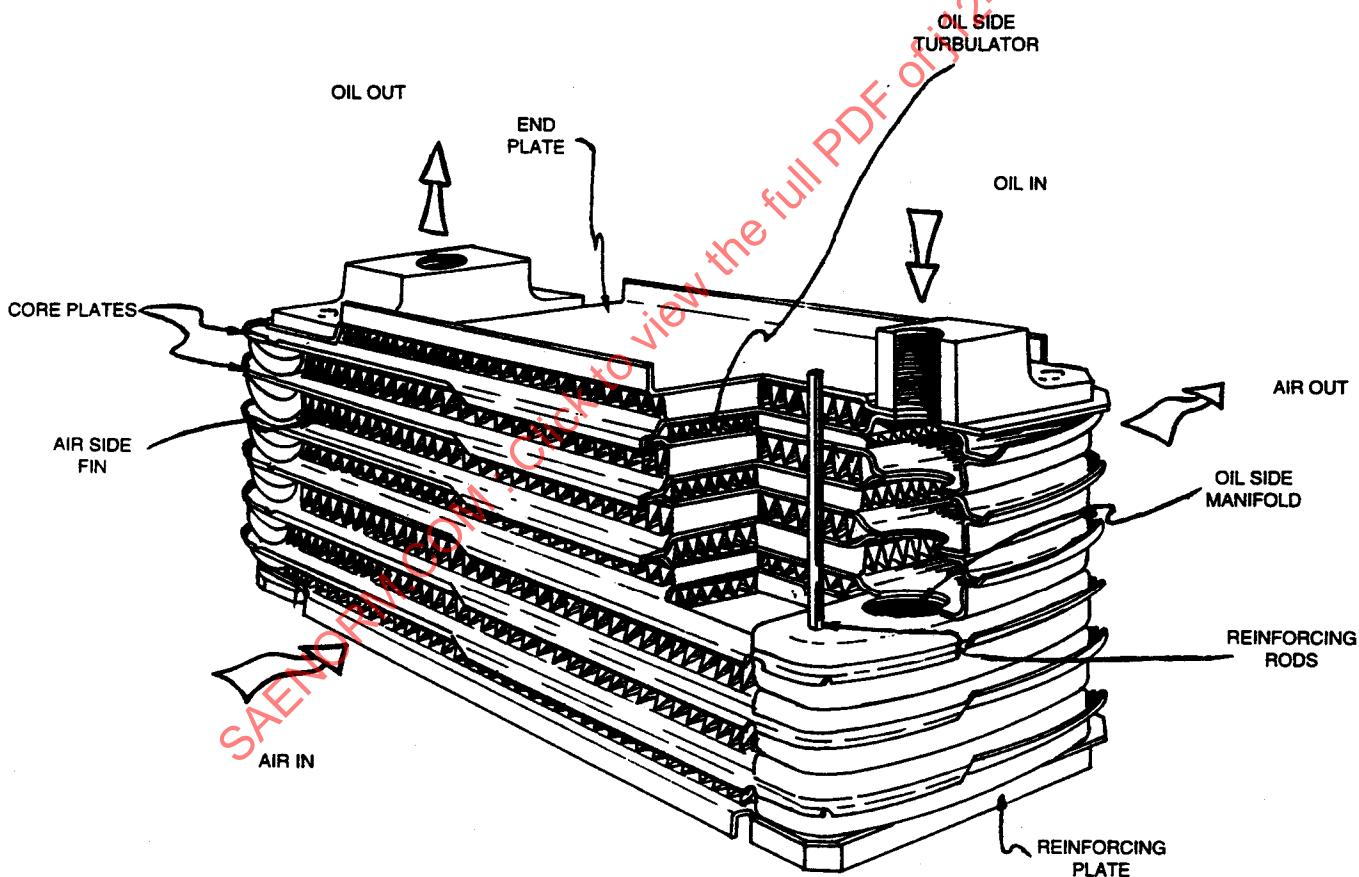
PLATE FIN SEPARATOR OIL TO AIR COOLER
